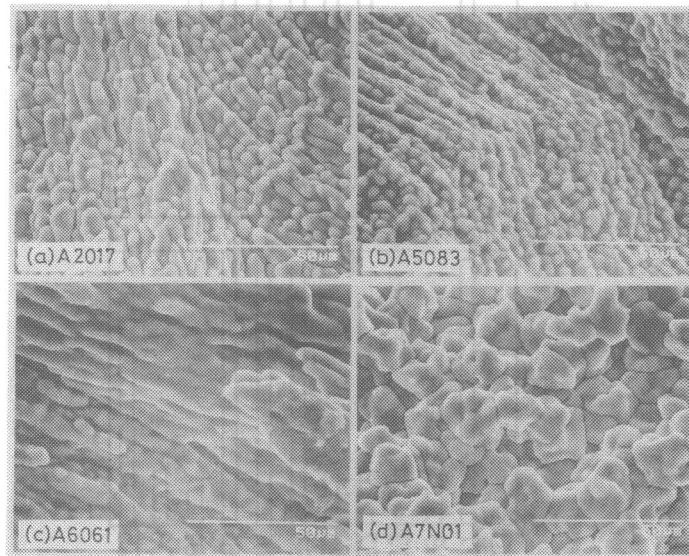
Typical fractograph of crack occurred on Fan-shaped test specimen.
